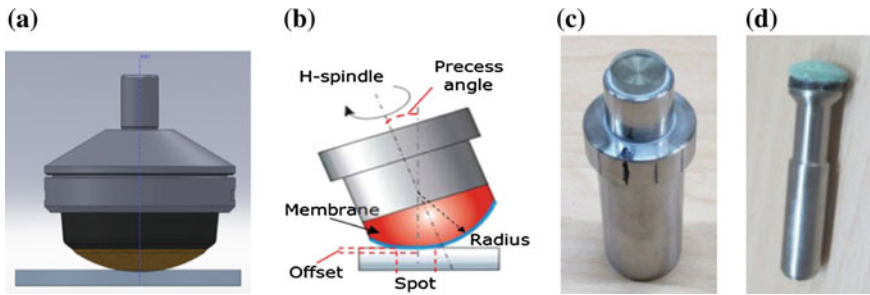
a Sub aperture tool. b Sub aperture tool geometry. c Mounting tool. d Polishing tool
